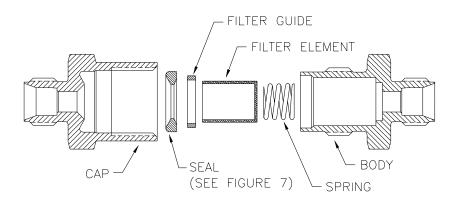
Inline Filter with Wire Cloth Element Exploded View
